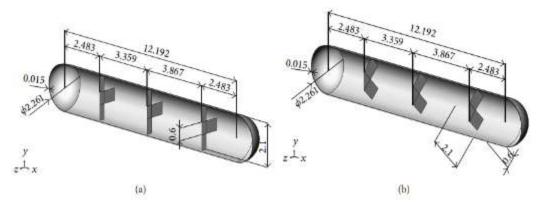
Studied circular cross-section road tanker and its dimensions, with (a) Type I ("+") and (b) Type II ("X") baffles
